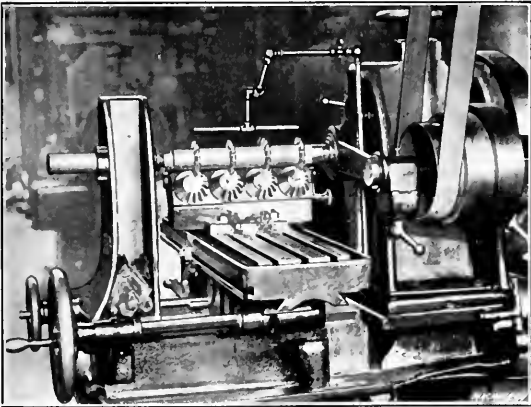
Multiple Fixture for roughing Teeth of Bevel Pinions, applied to Horizontal Milling Machine
